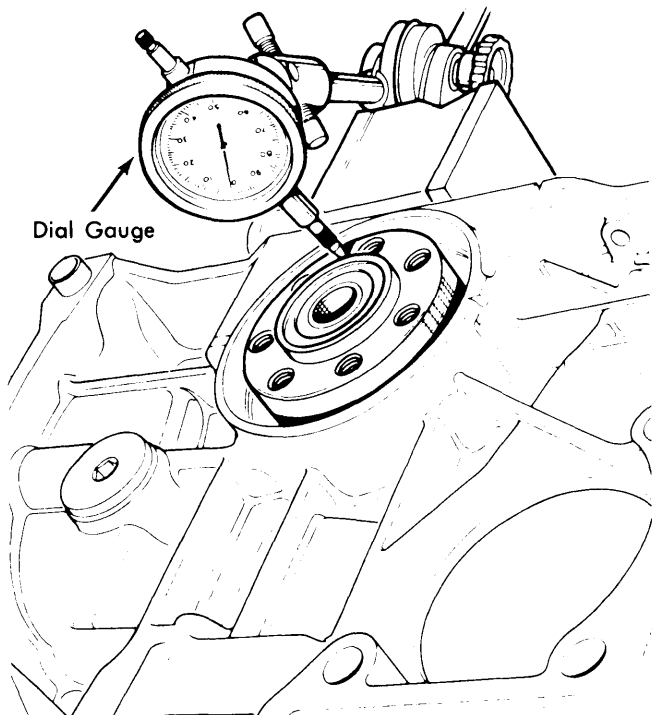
Using a Dial Gauge to Measure Crankshaft End Play
